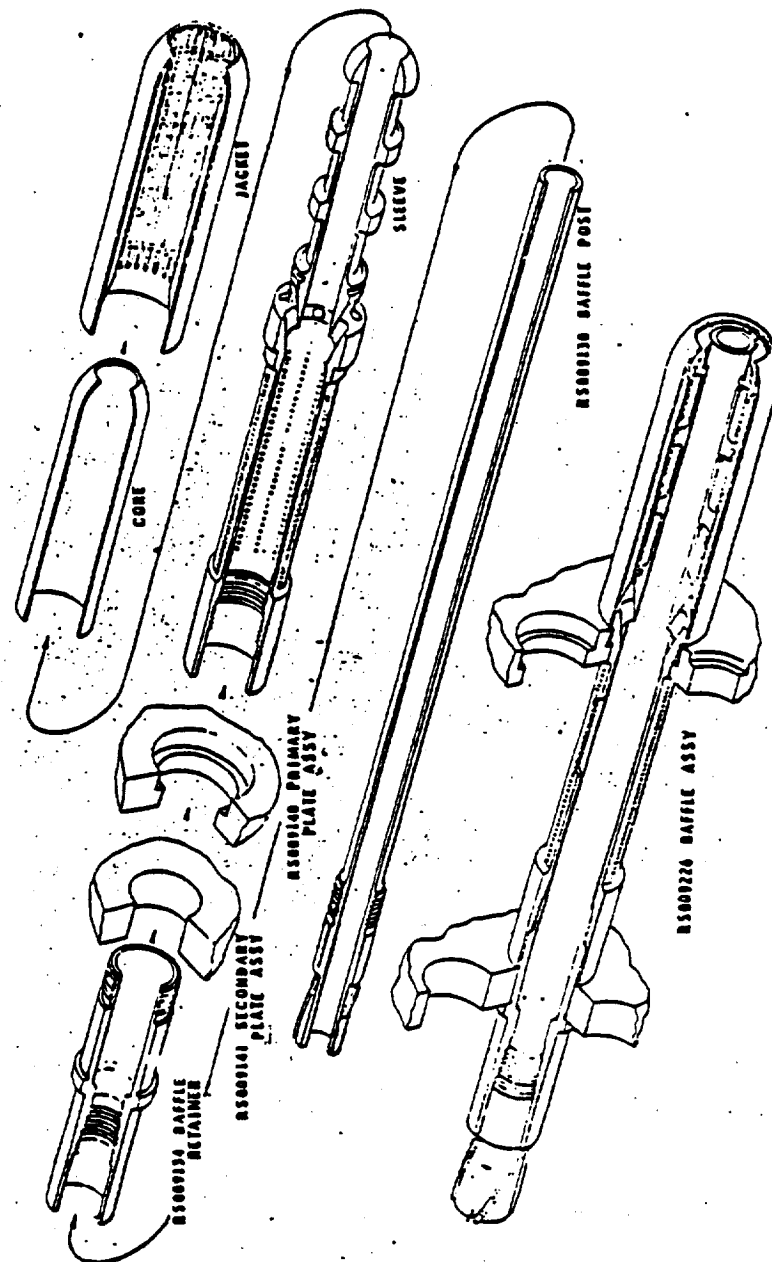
Assembly Schematic of Main Injector Baffle Element Assembly
